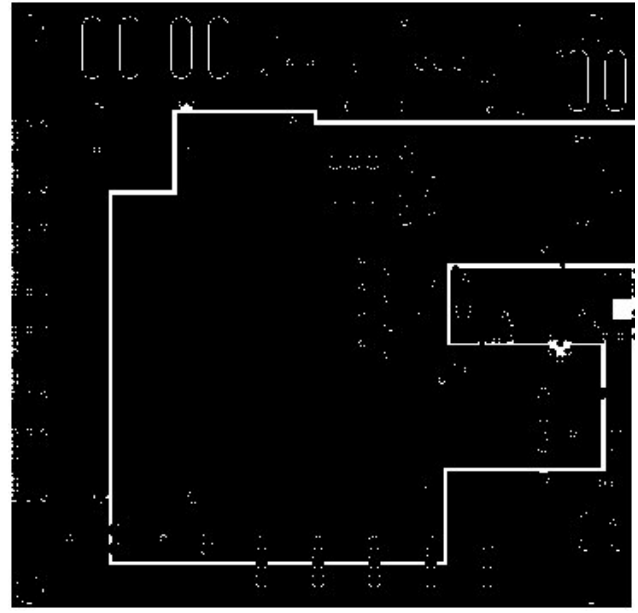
MAX3701 EV Kit PC Board Layout - Power Plane
